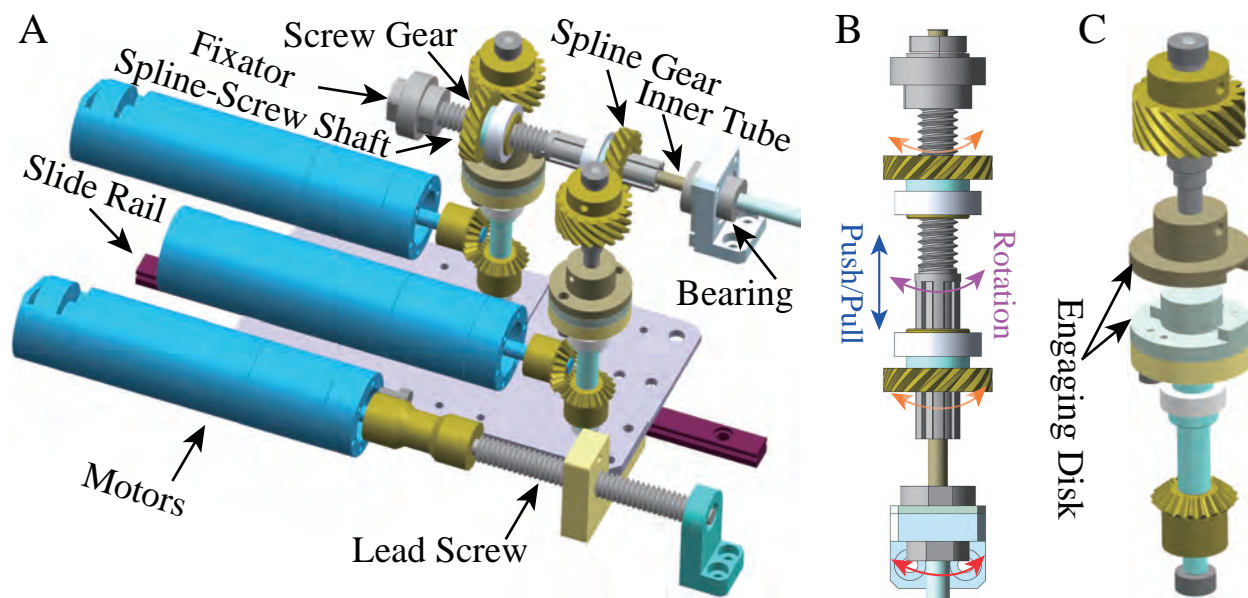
key actuation module for a single segment. (A) The outer tube is fixed on a bearing, and the inner tube is fixed on a spline-screw shaft. One DC motor rotates a lead screw to realize translation of the whole module. (B) Two gears (a spline gear and a screw gear) are respectively assembled on the shaft. Once the two gears rotate at an equal velocity (labeled by orange arrows), the shaft rotates accordingly (purple arrow). When the screw gear rotates and the spline gear keeps static, translational motion is achieved and the inner tube is being pushed or pulled (blue arrow). Two pairs of helical gear transmit motion from the motors. (C) For quick release/assembly, we designed engaging disk structures on the instrument component and the actuation component. The angle gear connects with a DC motor.
